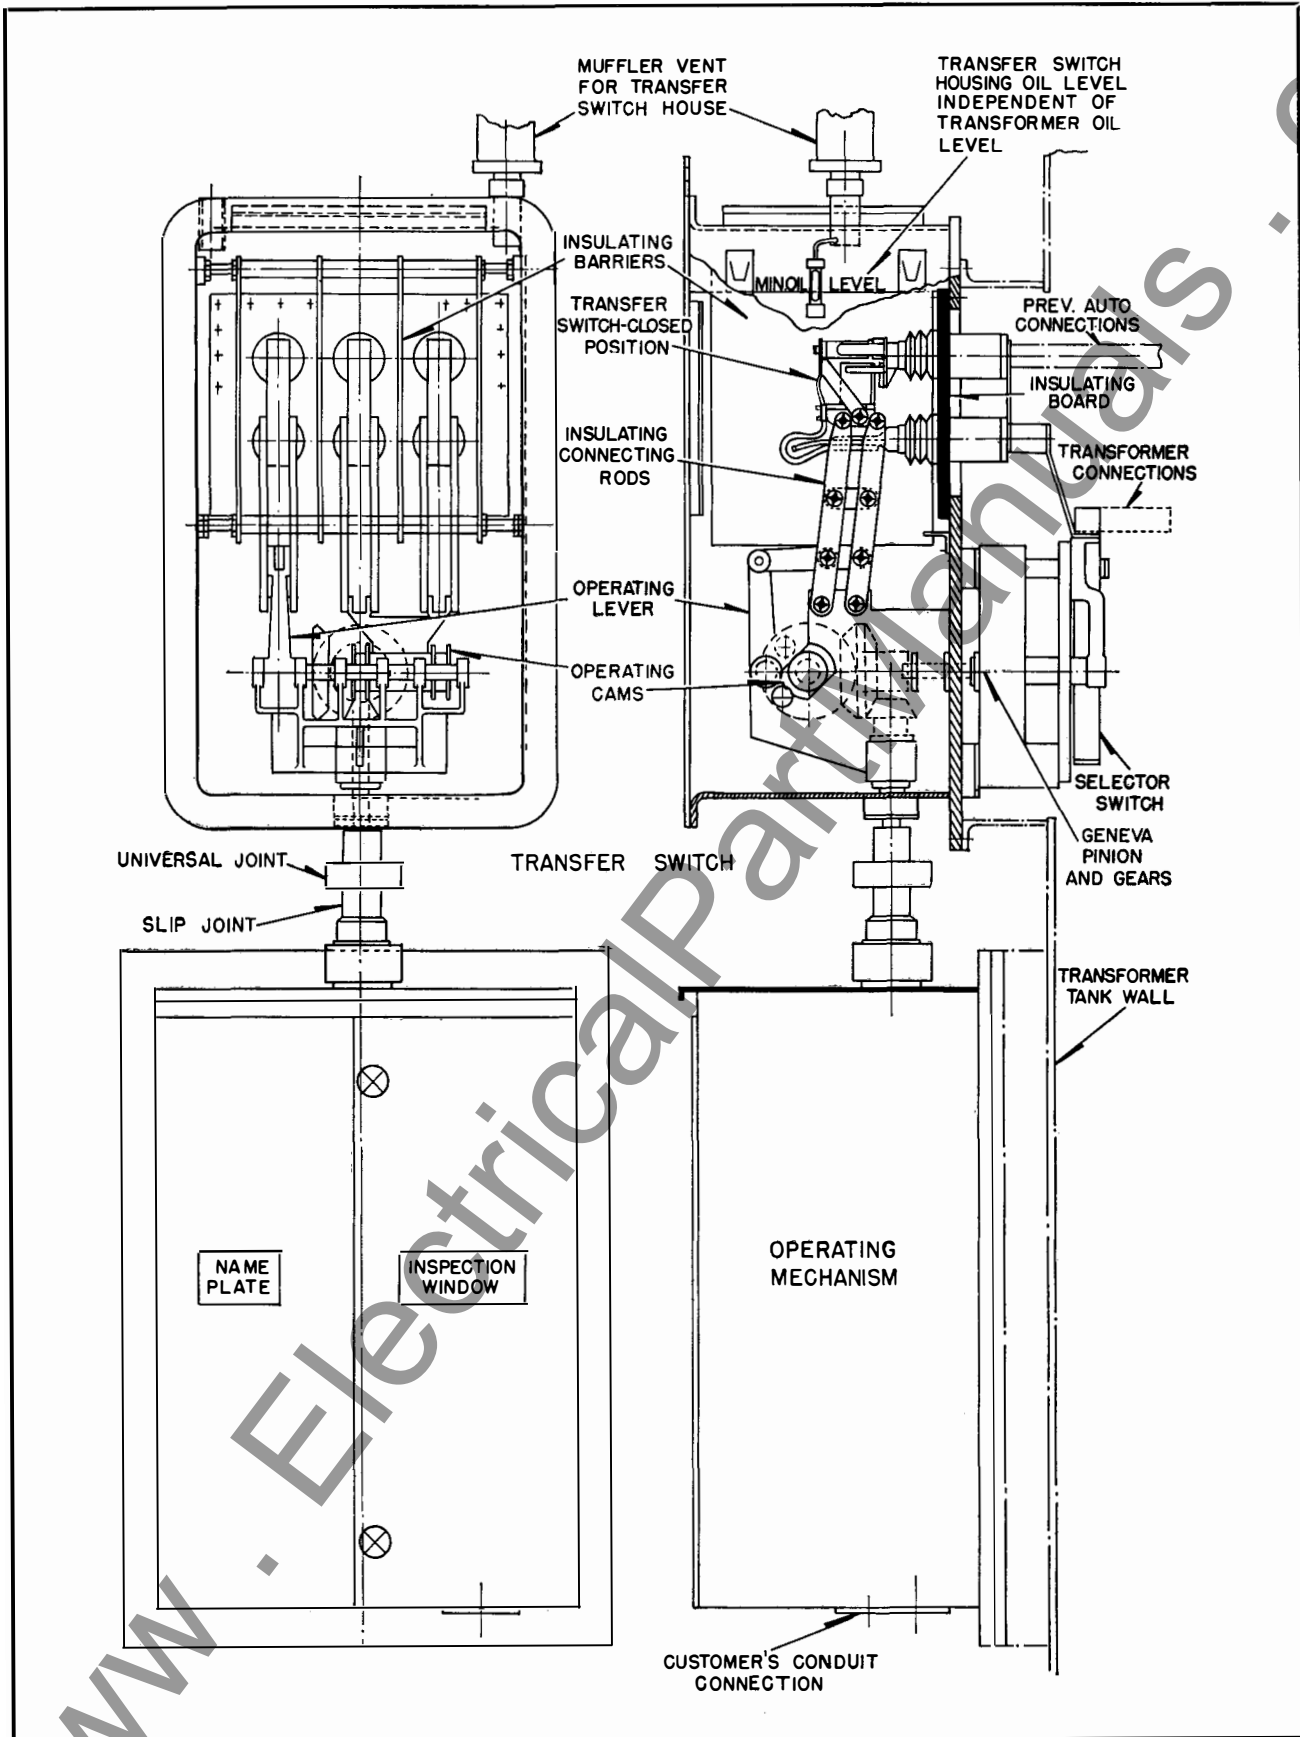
Schematic Arrangement of Type UTR Tap Changer and Operating Mechanism.
